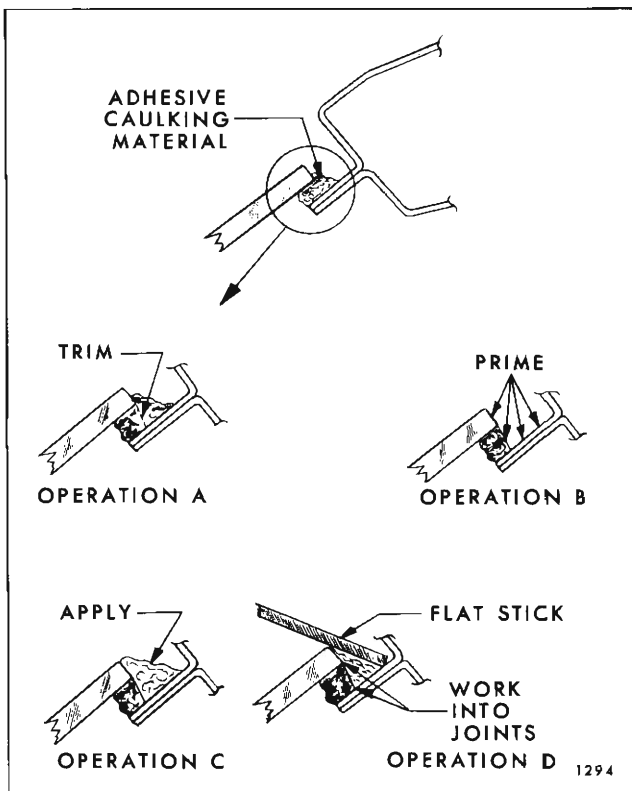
E13—Correction of Adhesive Caulked Glass Installation Waterleaks
